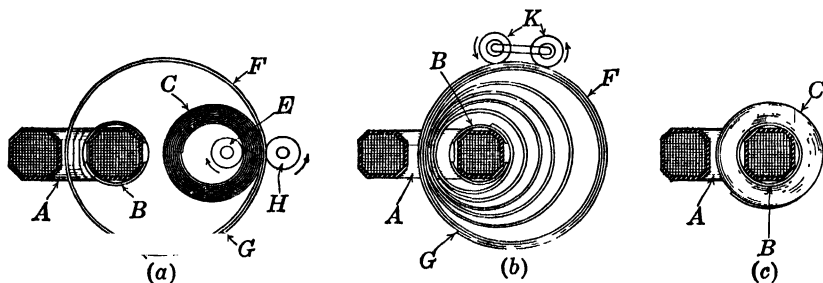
Winding core about coil in spirakore transformer. (General Electric Co.)
